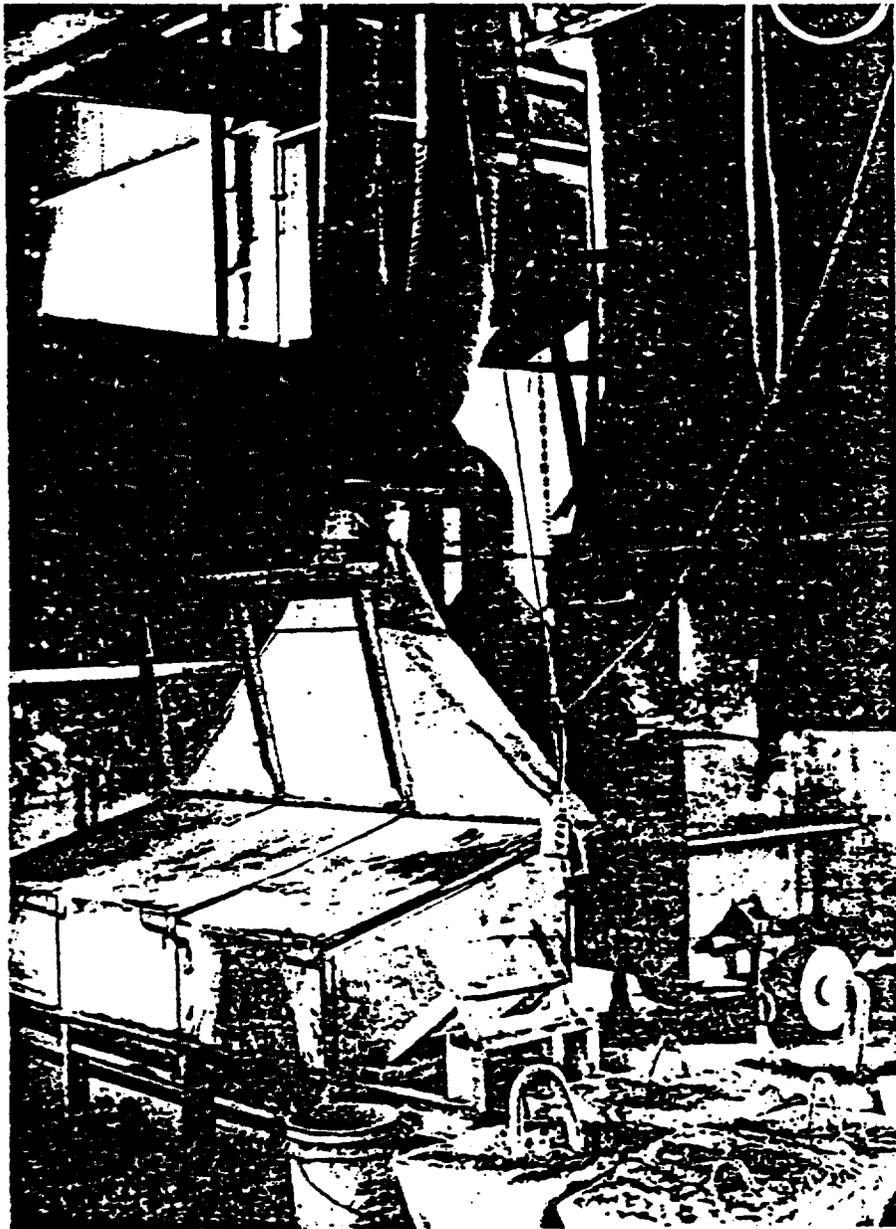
BLAST FURNACE BLOCK CASTING HOOD
